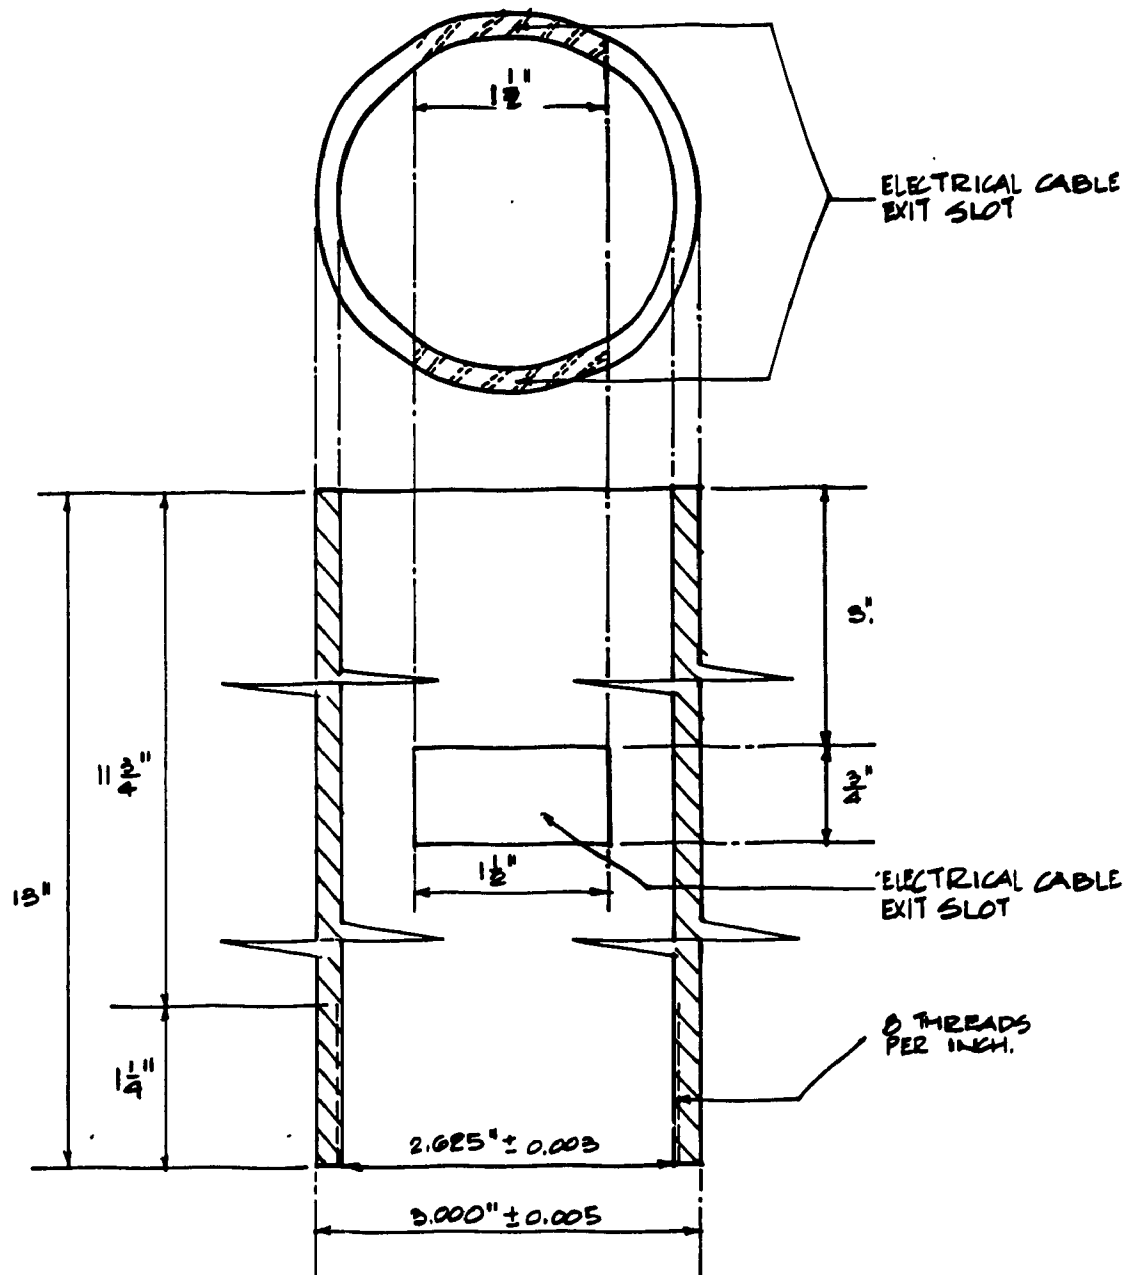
Steel Pipe Section (Part No. 2, Fig. A 4.7)
